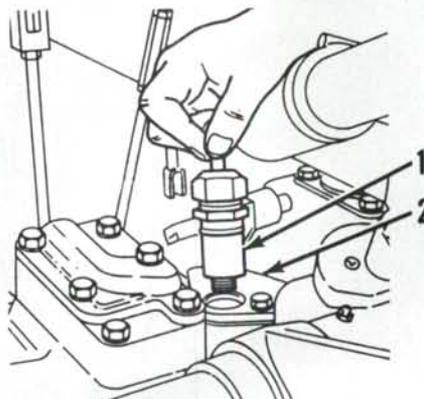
On models equipped with a dump valve (except 1594 and 1690), dump valve (1) and plate (2) must be removed from top of selectamatic valve to gain access to bleed points. Refer to paragraph 308.
